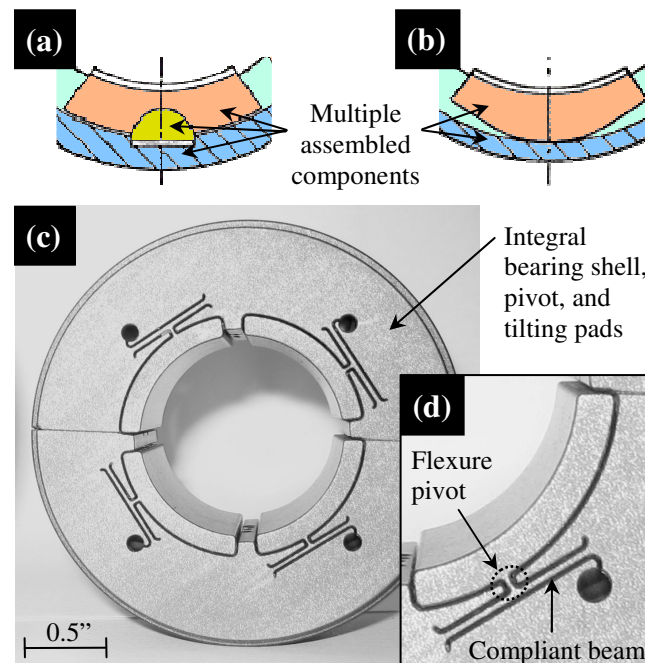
Tilting pad bearing technology – different tilting pad types: (a) spherical seat and (b) rocker-types (images from [13]), (c) picture of manufactured FPTPGB-C, (d) magnified view of wire-EDM structure.
